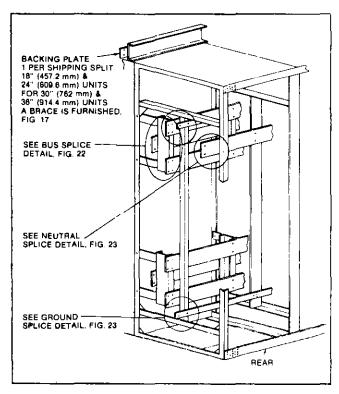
Neutral and Ground Bus Bar Connections on Indoor Switchgear
